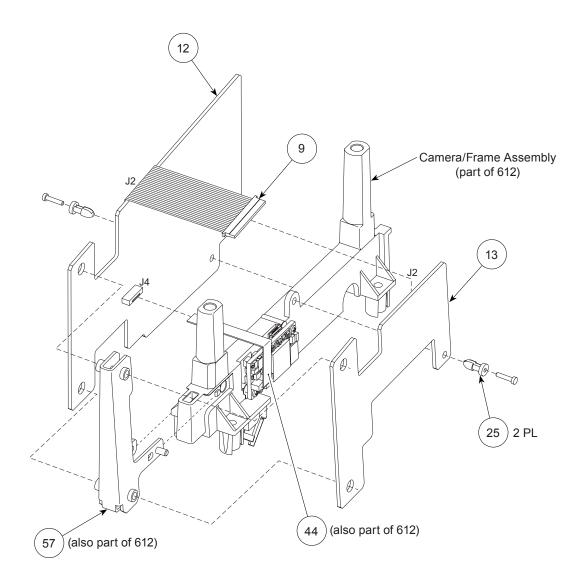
Board/Frame Assembly - Front Case Assembly
